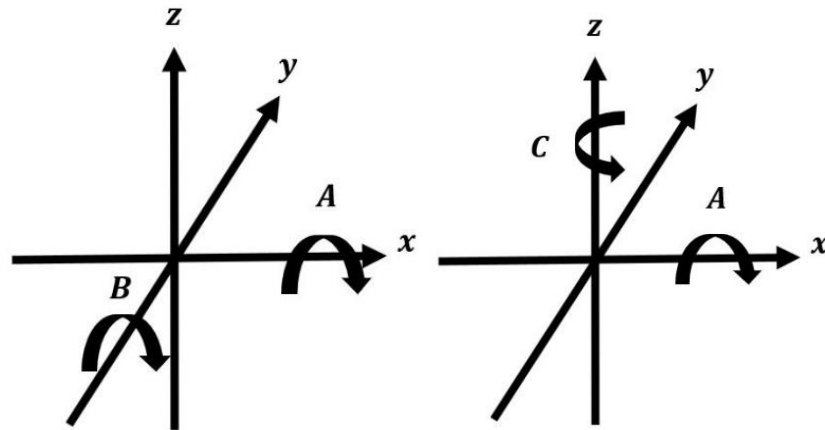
(a) AB type 5-axis milling layout (b) AC type 5-axis milling layout
